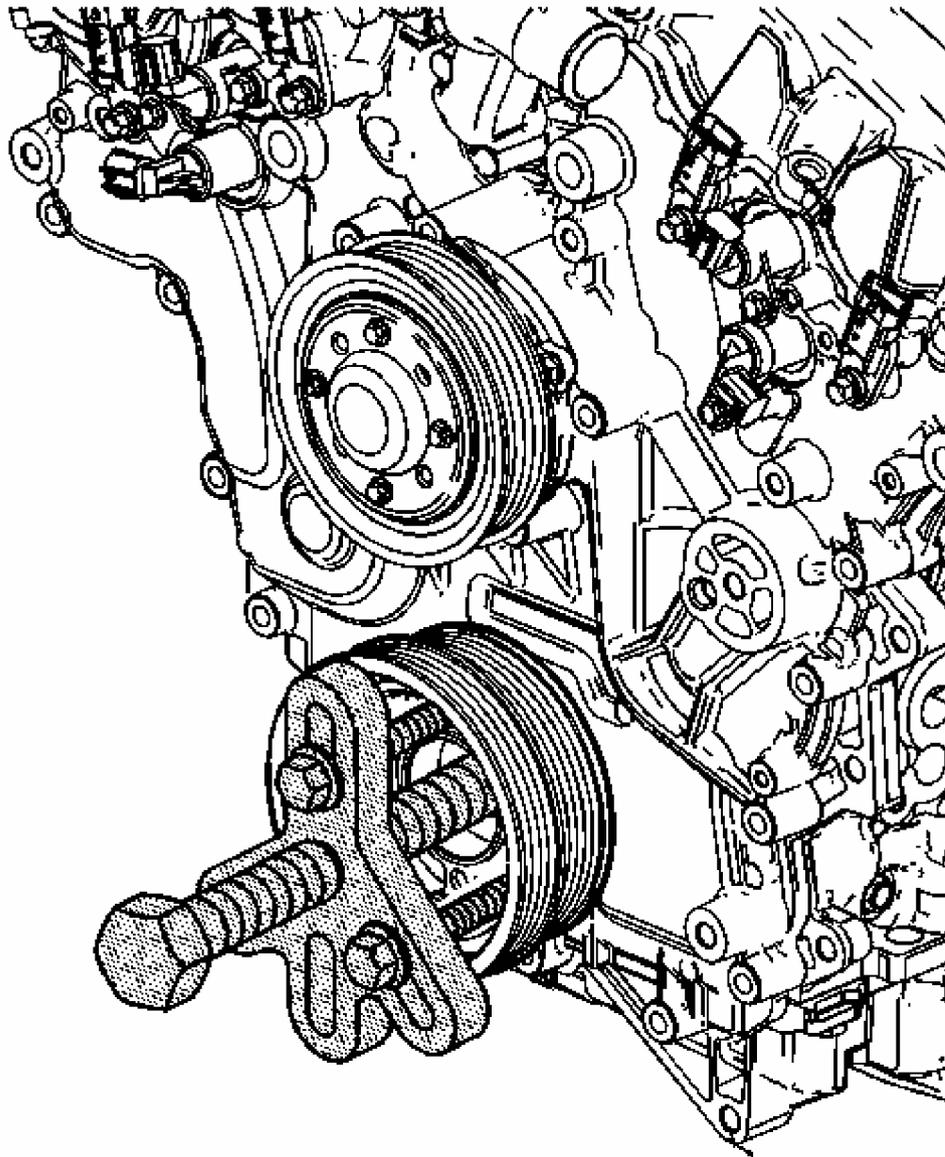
View Of Crankshaft Balancer & Bolt
